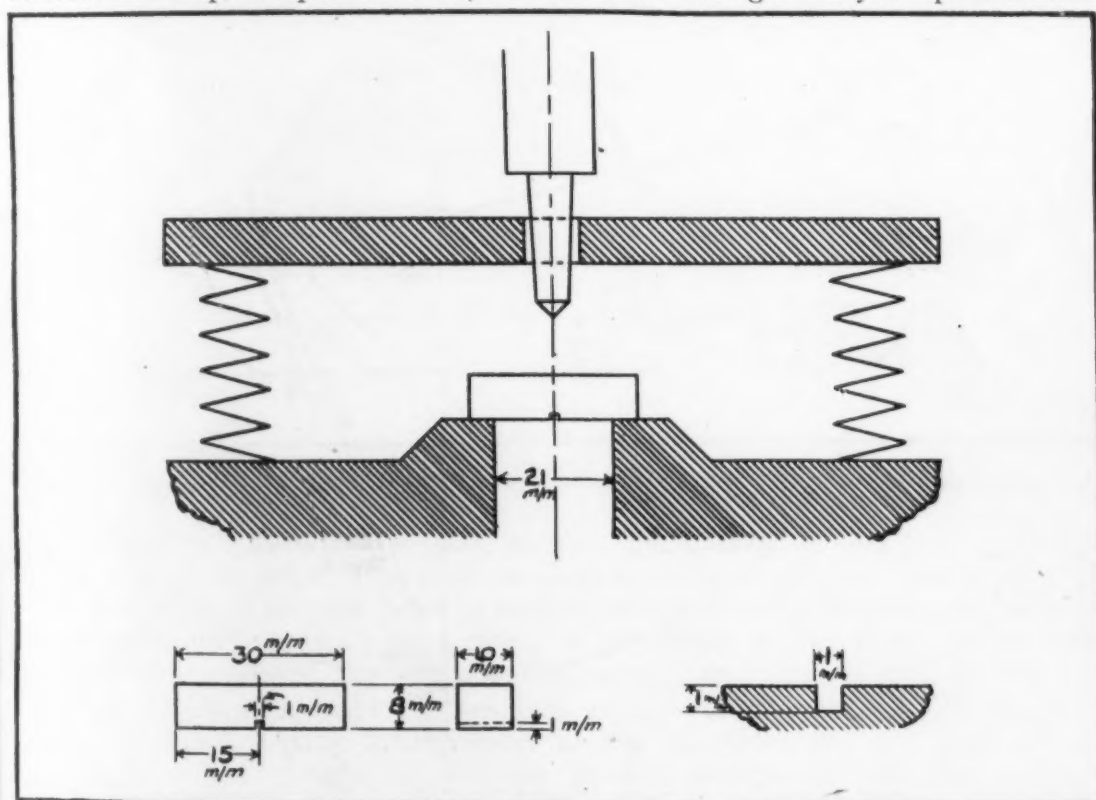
Arrangement of Fremont impact testing machine with sketch of test specimen shown below
